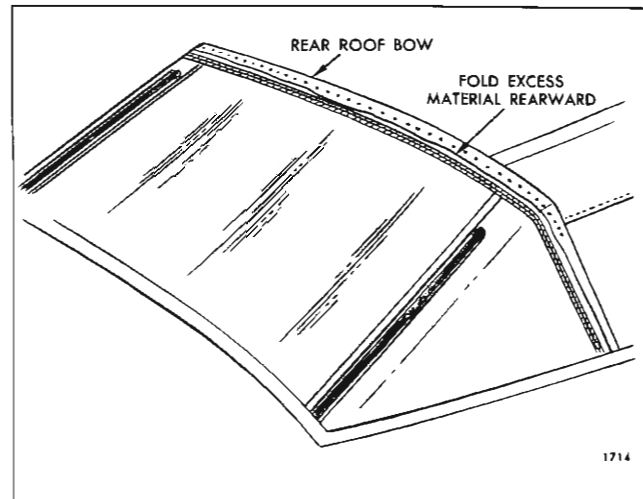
I-46—Back Curtain Installation at Rear Roof Bow
